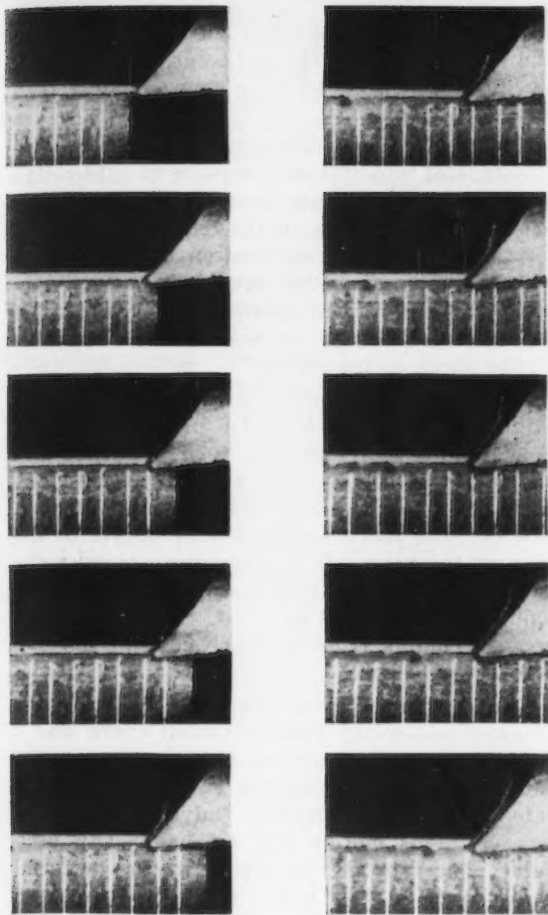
Milling machine sequence showing cutting tool taking rough cut on a cold-rolled steel block.
